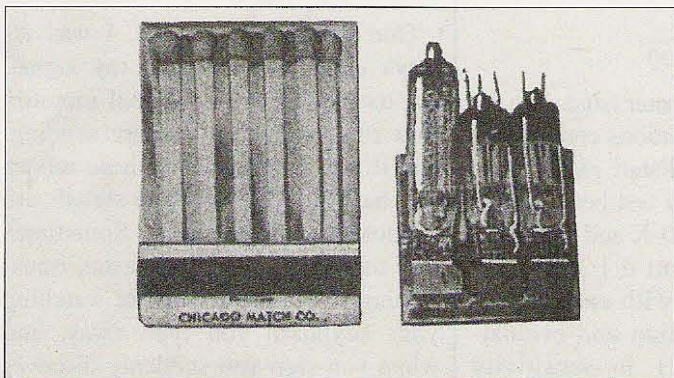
Photo M. Miniature tubes mounted on a printed circuit board. Photo ref. 6, pg. 174.
